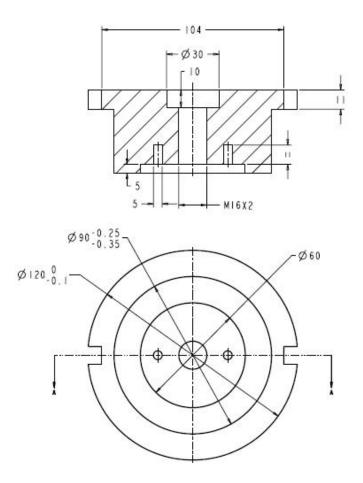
Technical Drawing of the Interchangeable Component of Upper Blanking Die
